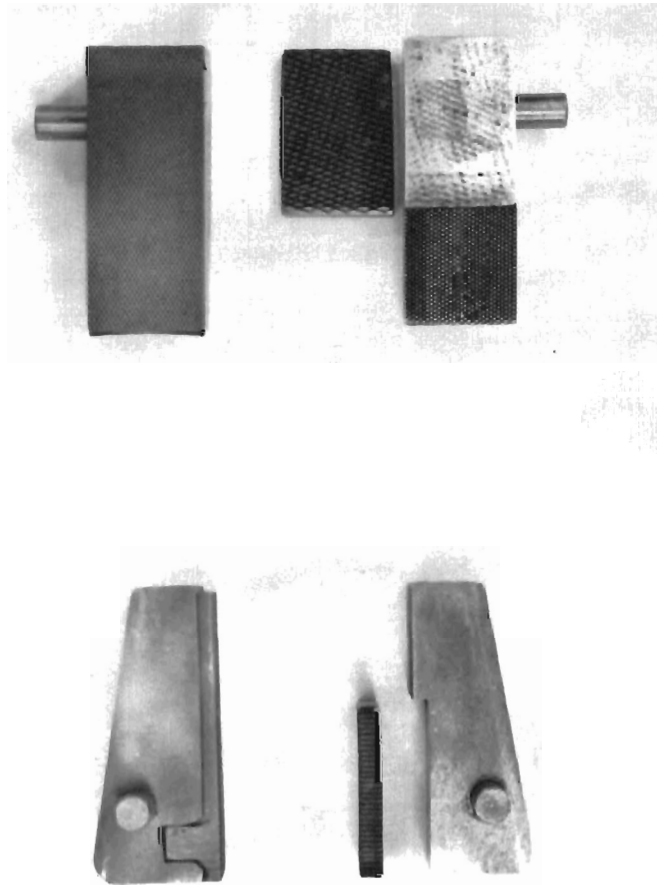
Modified Jaws: Top Shows Serrated Gripping Surfaces
